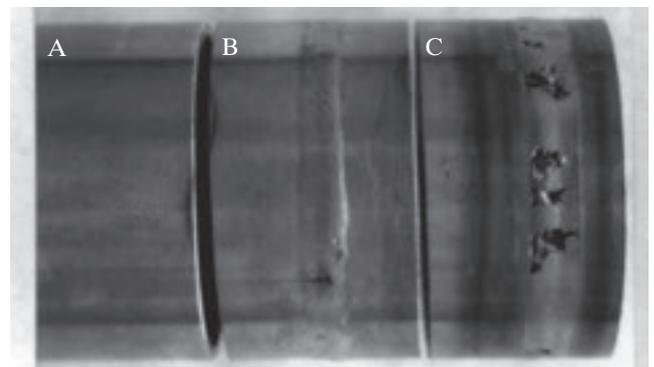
6% Mo samples after accelerated corrosion test. A — Unwelded tube sample; B — weld with ERNiCrMo-10 filler metal; C — autogenous weld.
